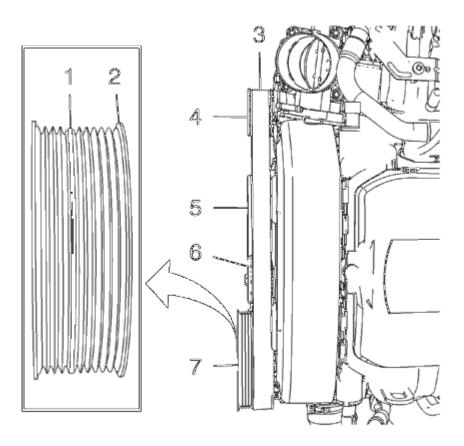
Checking Drive Belt Position Courtesy of GENERAL MOTORS COMPANY
